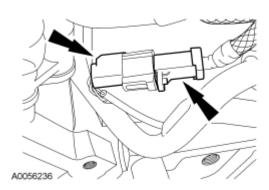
Locating Knock Sensor (KS) Electrical Connector And Wiring Harness Pin-Type Retainer
